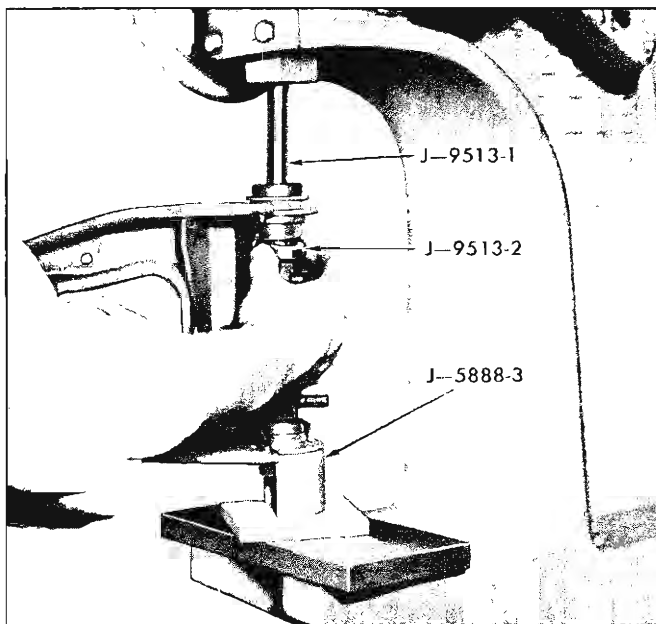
Installing Bushing Remover J-9513-2—Chevy II
